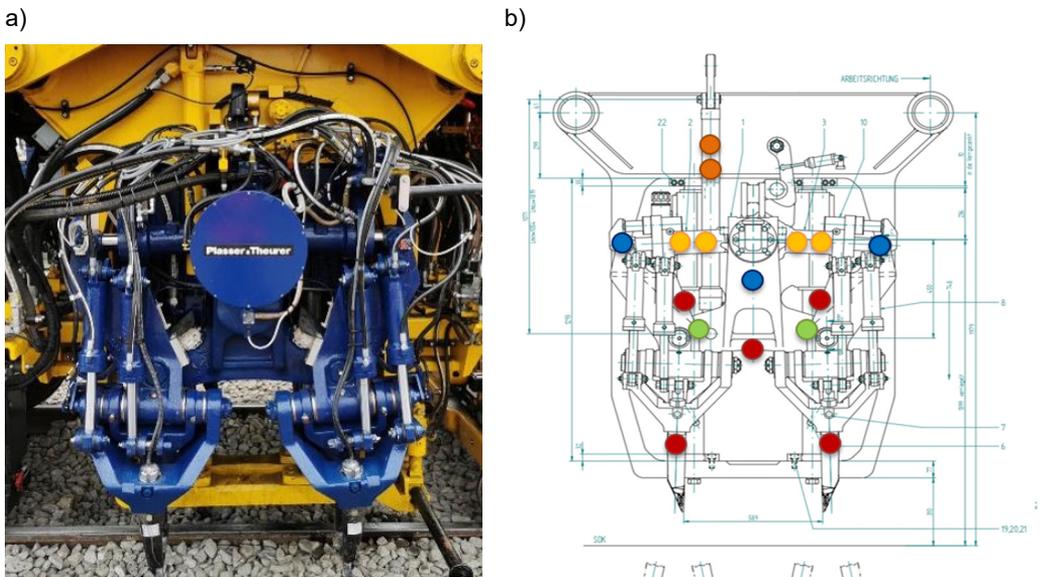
(a) Tamping unit of the universal tamping machine *Unimat 09-4x4/4s E³* (b) Position of the installed sensors
